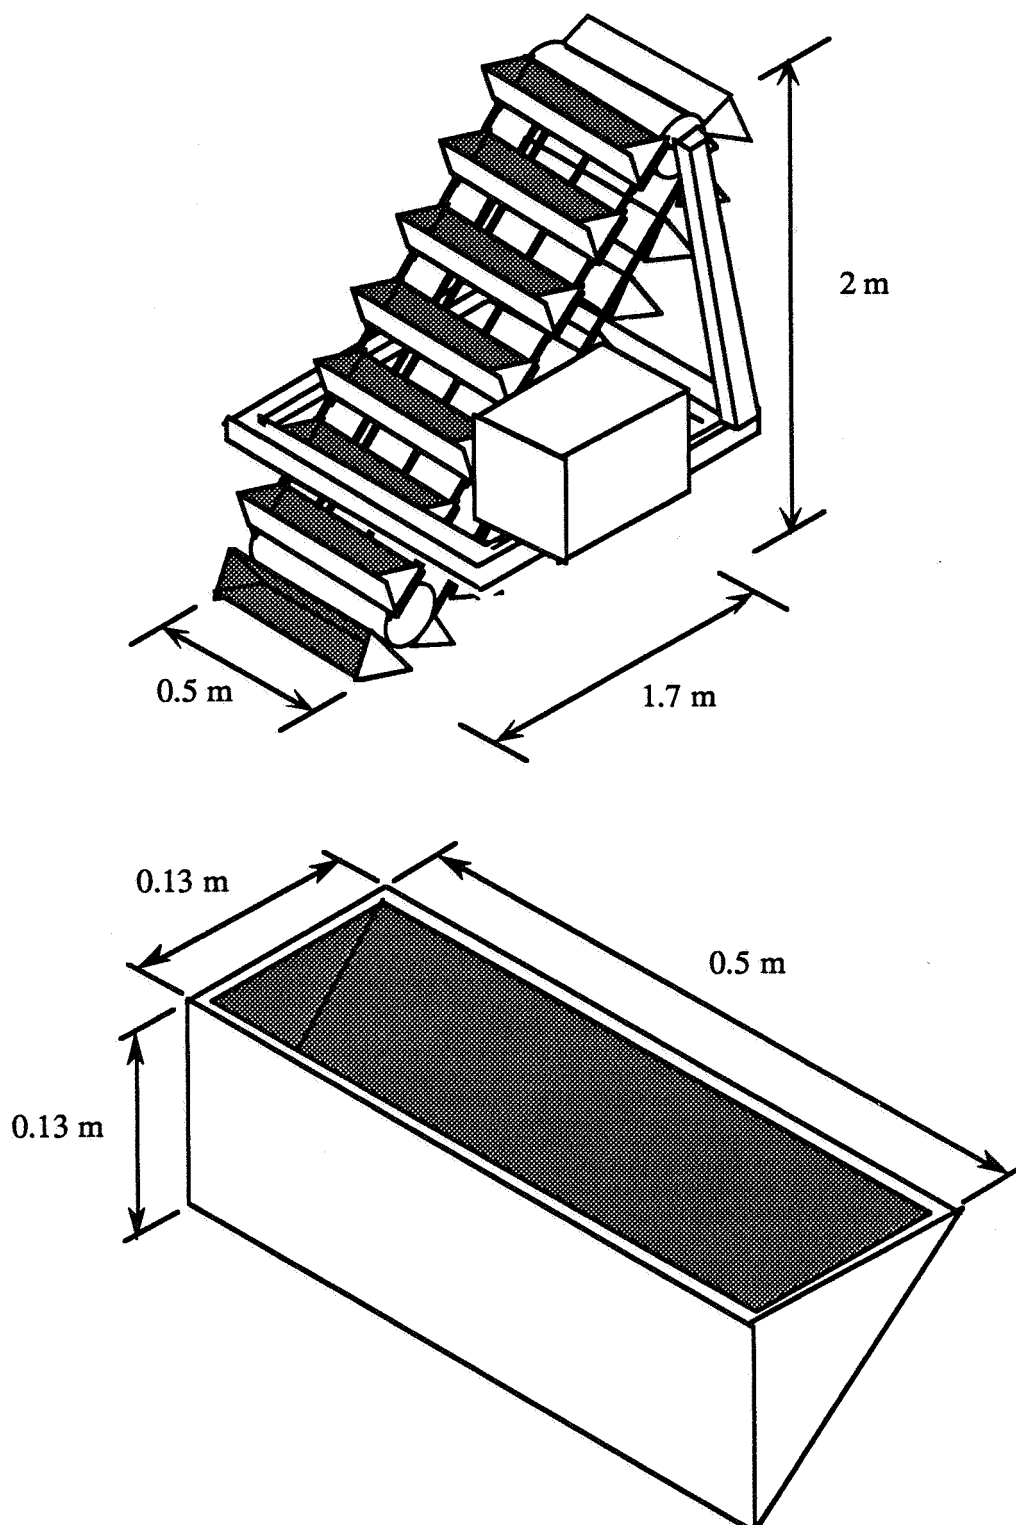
BUCKET CONVEYOR AND BUCKET DIMENSIONS
